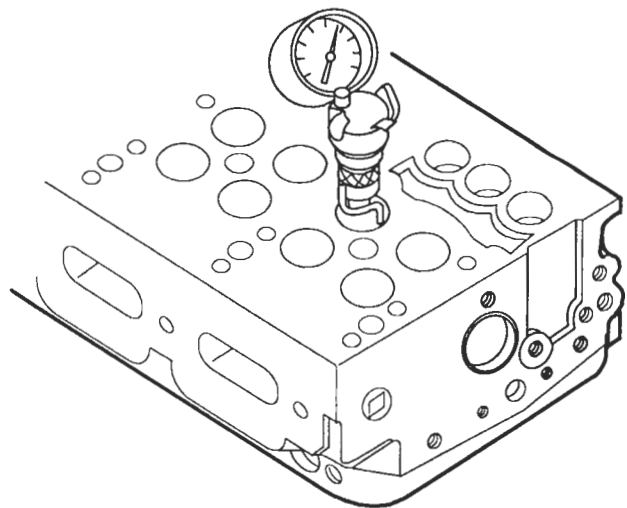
Determining Concentricity of Valve Seat Insert with Dial Indicator
